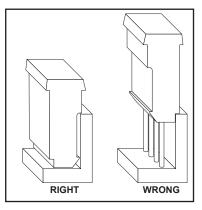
Be careful to maintain PSB cable polarity with keyed plugs.
